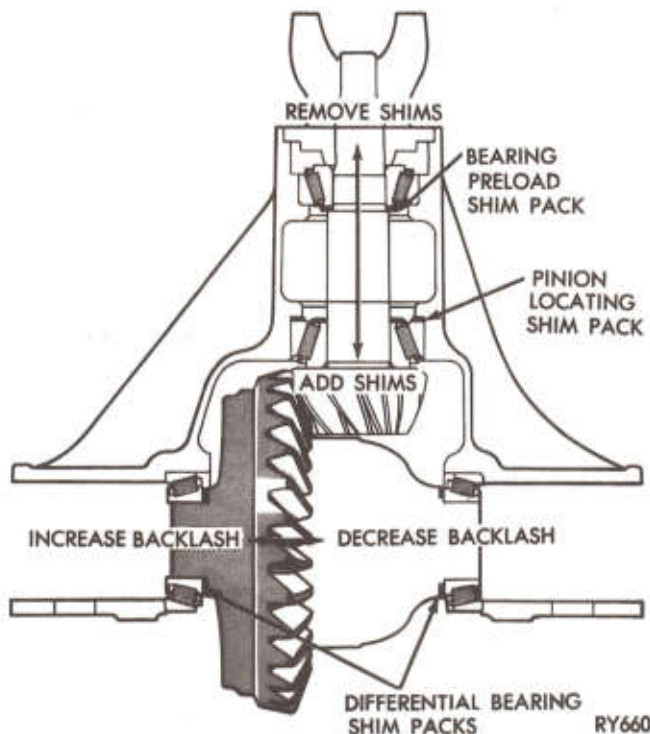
Use of Shims to Adjust Gear Tooth Contact
